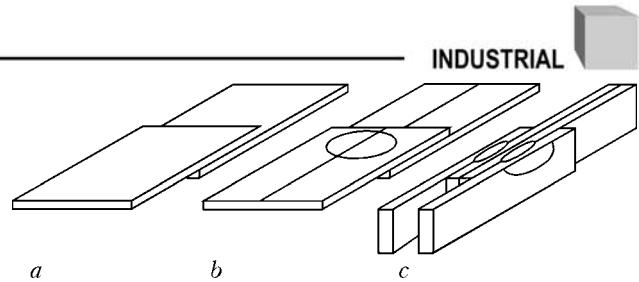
Schematic of welded sample preparation to microsection cutting out: a – before welding; b – after welding with the line of the cut along the spot weld; c – for microsection preparation
